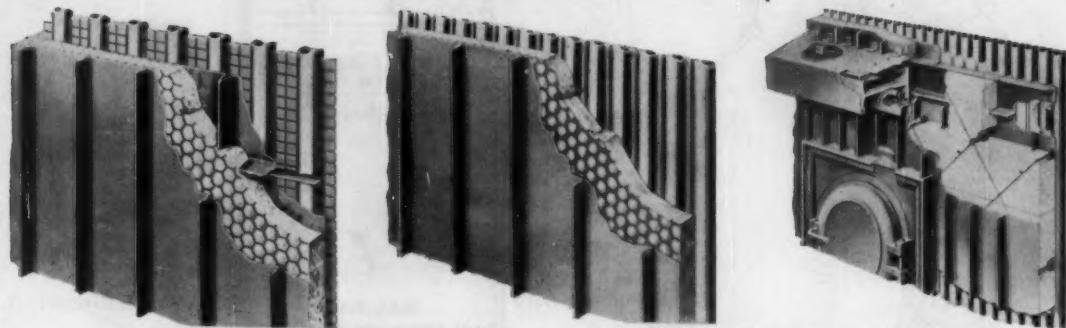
The pressure-fired furnace. Three wall constructions for complete water cooling. Left, studded-tube wall showing inner casing, blanket insulation, and metal lagging. Center, membrane wall showing blanket insulation and metal lagging. Right, tangent-tube wall showing inner casing, block insulation, and metal lagging.
